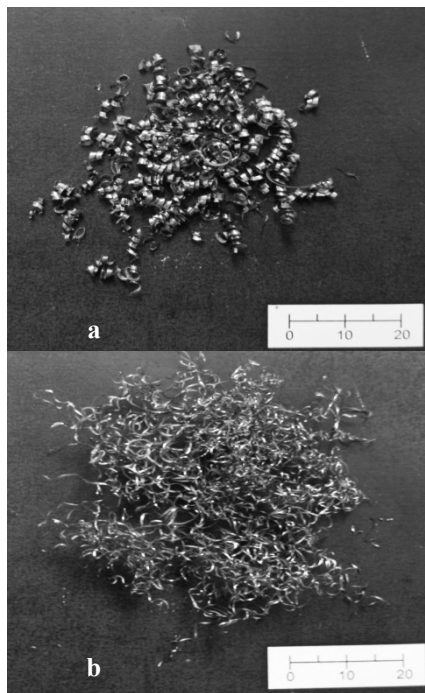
Chip formation at turning a) LENS testing probes, b) »classical« Ti-testing probes
